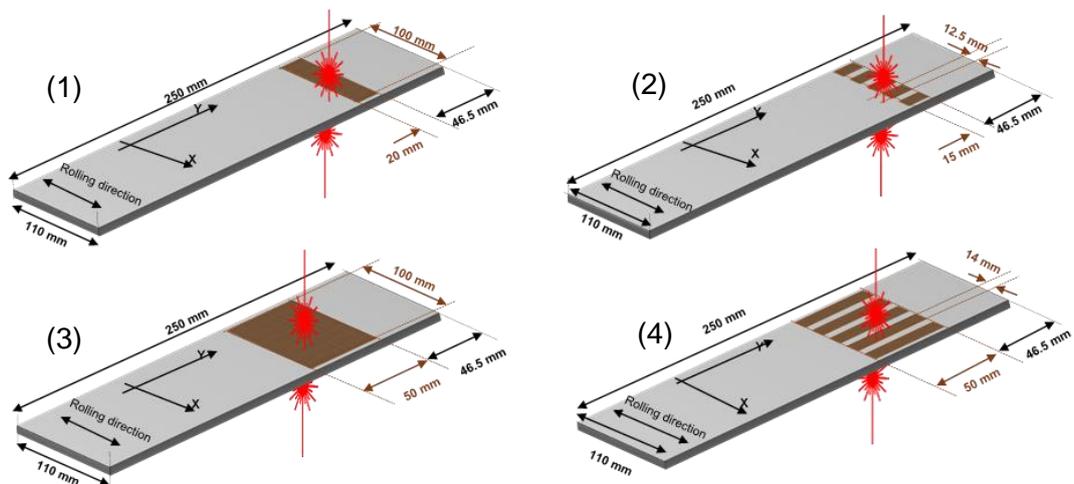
Peening patterns applied to bolted lap joint elements prior to assembly.
